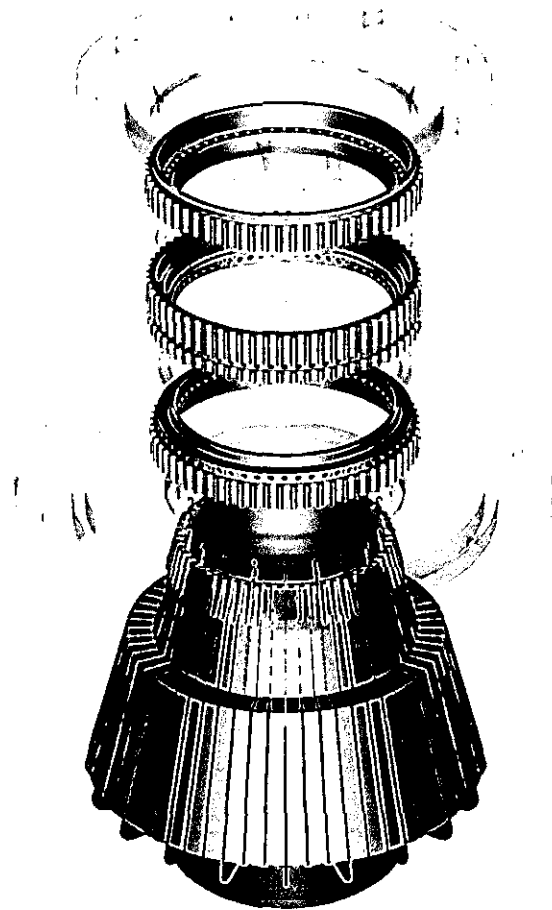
Exploded Assembly of Tricked Cone and Patterning Rings.
